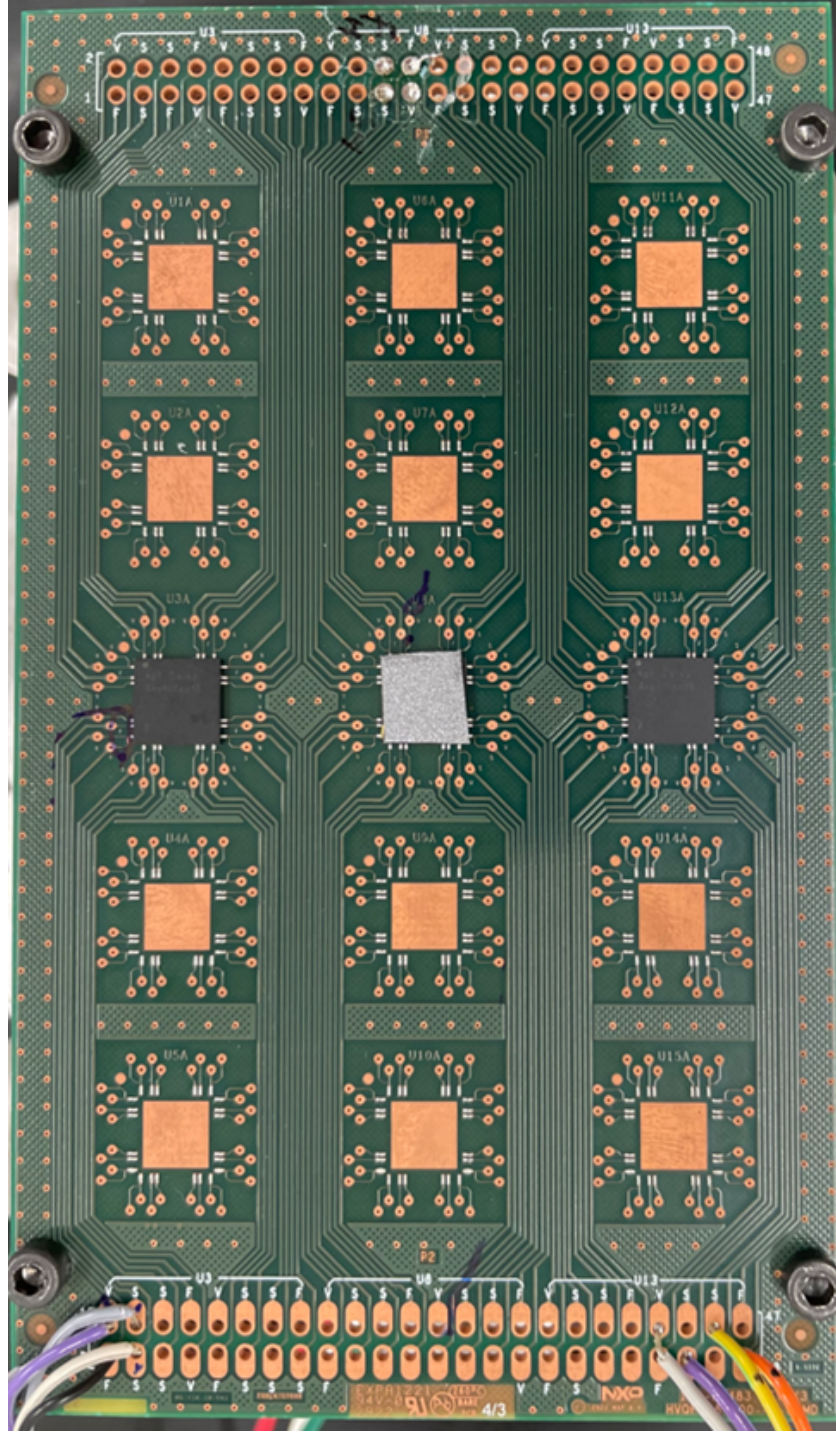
QFN package test vehicle PCB, side A where only corner solder joints are connected. The layout are follow [11]
